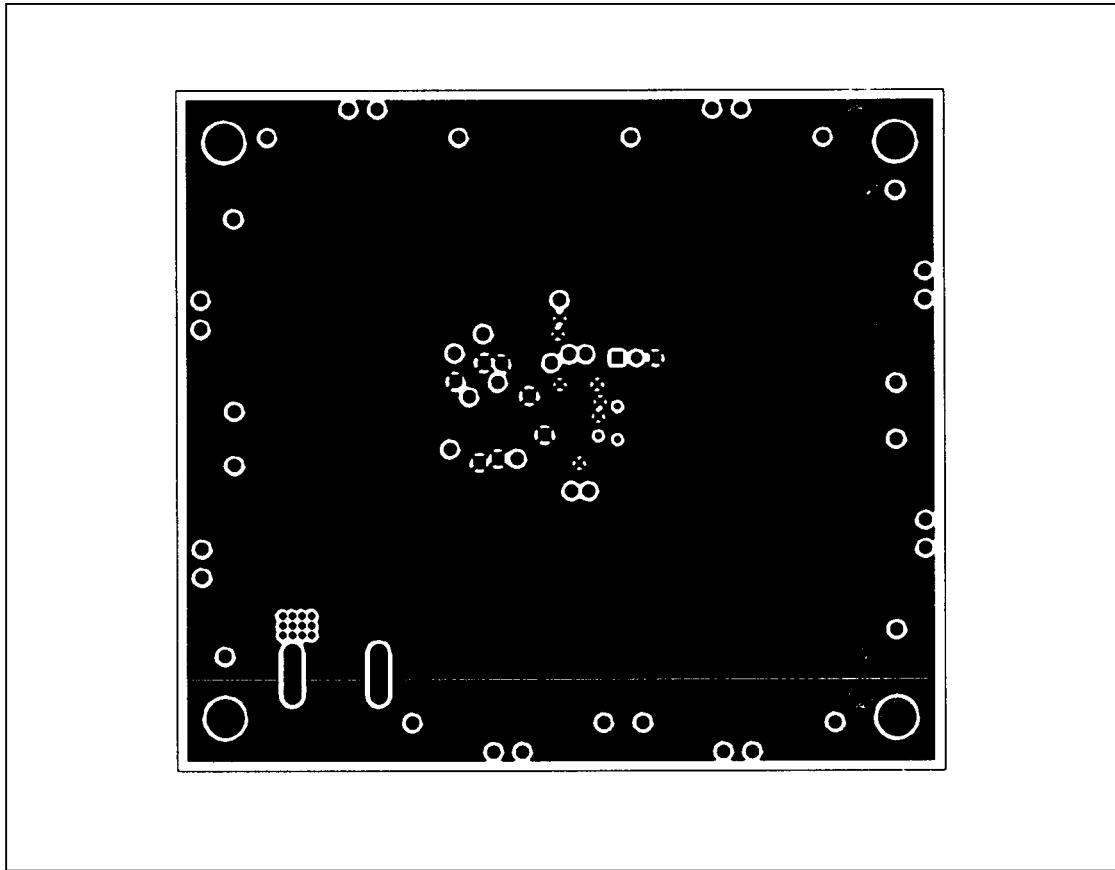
MAX3681 EV Kit PC Board Layout—Power Plane
